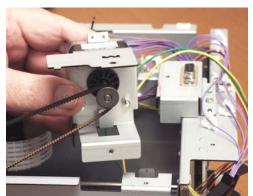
Remove Motor and Bracket Assembly; Remove Carriage Drive Belt
